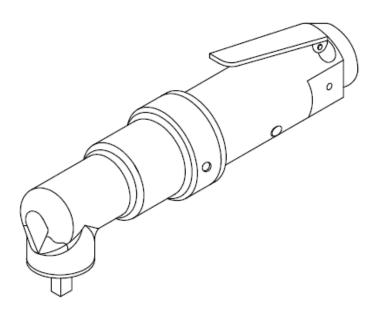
ANGLE DRIVE HYDRAULIC IMPULSE TOOL
